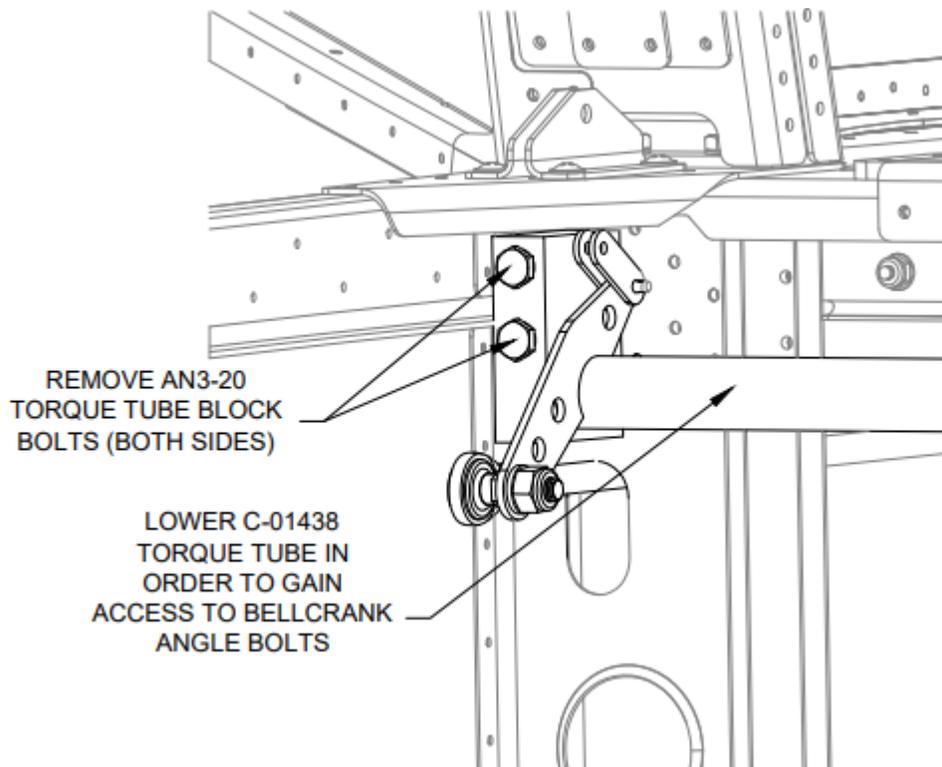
BELLCRANK ANGLE BOLTS ACCESS
